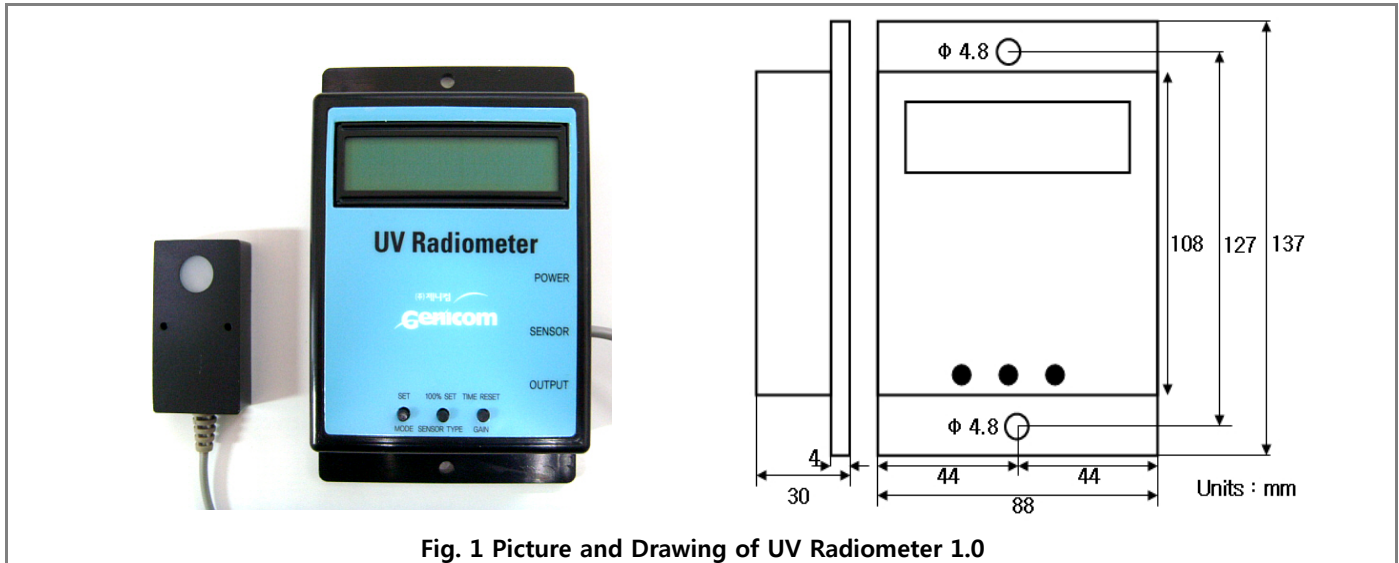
Picture and Drawing of UV Radiometer 1.0
